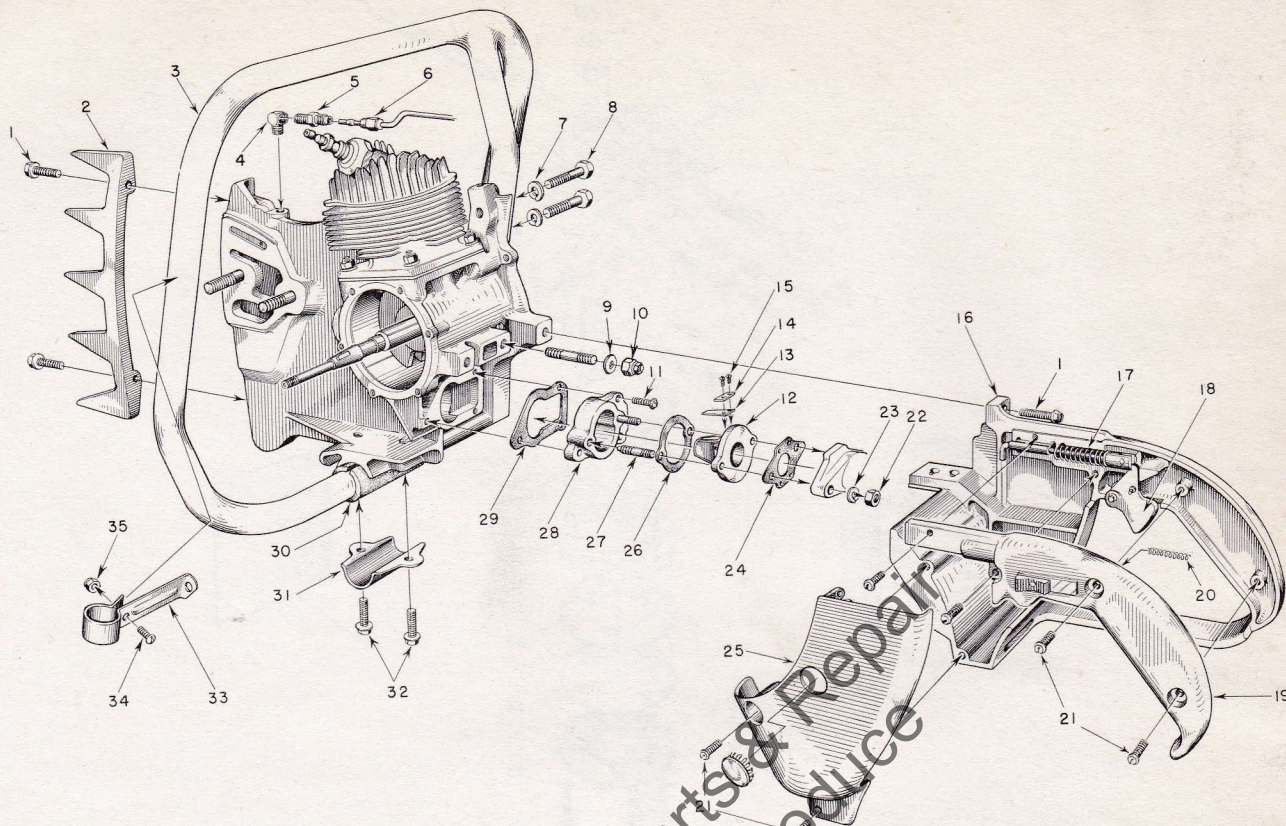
HANDLE GRIP AND REED VALVE PARTS
